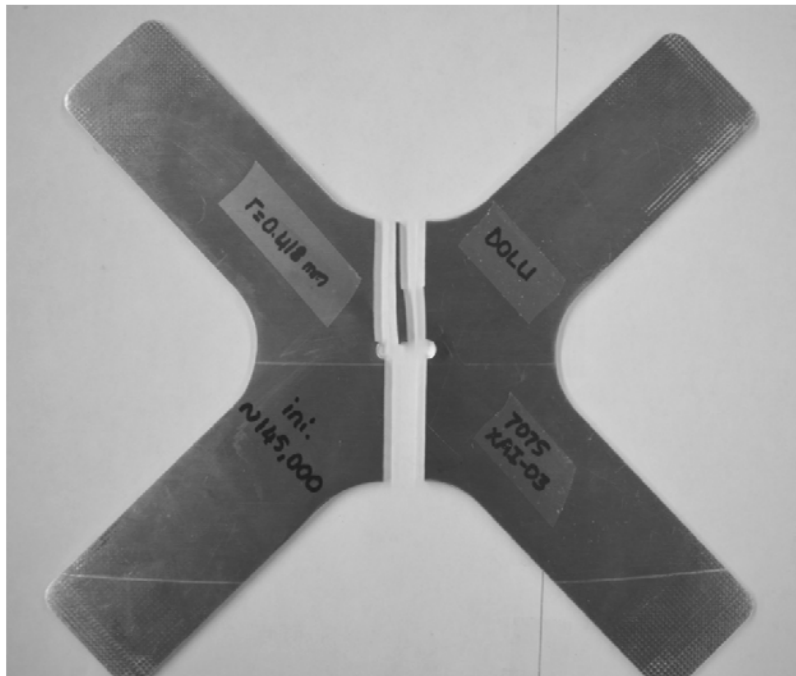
The cut of the fracture surface from the specimen.
